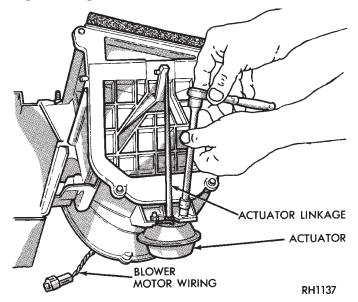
Removing or Installing Fresh/Recirc Vacuum Actuator
